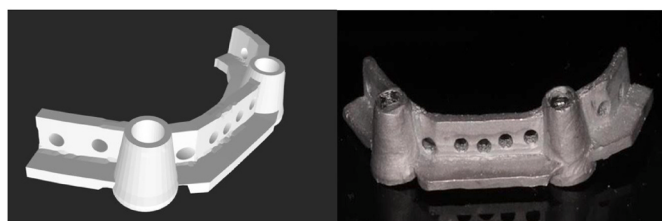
Inverted T-shaped bar with additional retention holes, with dimensions of 4 mm in height, a base width of 5 mm, and a lower step height of 2 mm.
